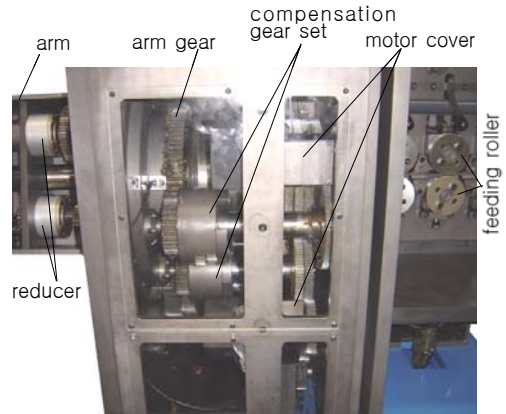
Developed gear train for 4 internal components of CNC wire bending machine
